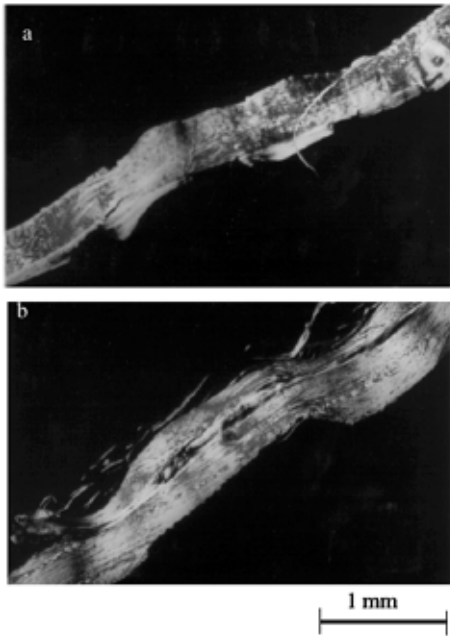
Typical fracture paths of a good weld ($T_5 - 370^\circ\text{C}$). (a) shear test; (b) peel test.
